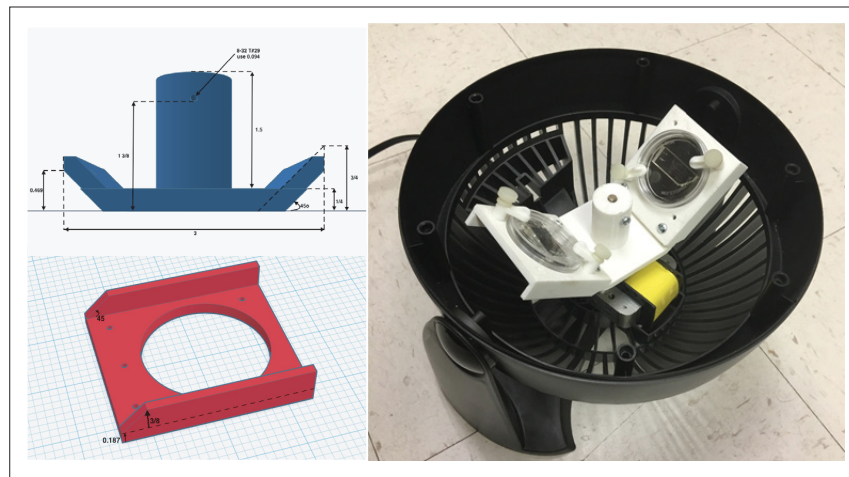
figure supplement 1. Inexpensive fabrication of cell loader with 3D printing. An inexpensive device for loading cells into the mother machine. The construction involves 3D printing a custom holder/rotor for a 50-mm WillCo dish, on which a mother machine is attached. The holder is printed in three parts (two blades and a central base) to account for 3D printers with small printing areas. This piece is then assembled and secured to a Honeywell fan from which the original blade has been removed. CAD files and details of the fan centrifuge construction are available at [Thiermann, 2023](#).
